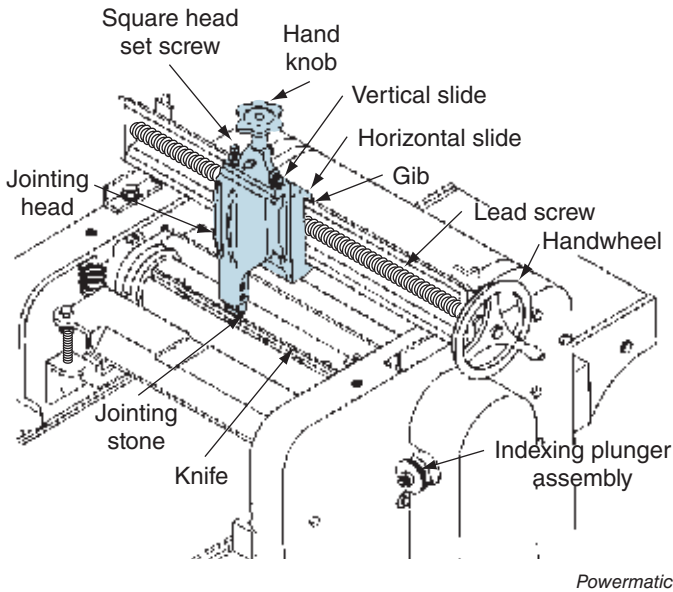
Jointing ensures that all knives project equally, enabling faster feed rates. The jointing attachment is bolted to the machine.
